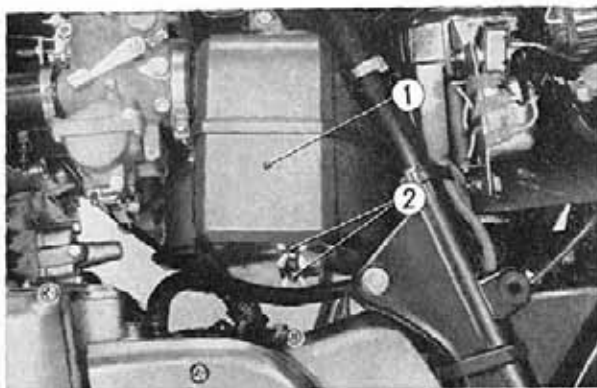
① Air cleaner cover ② Wing nuts
